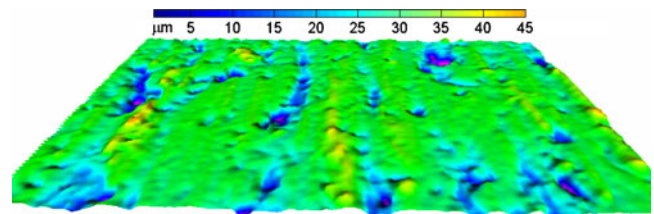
Surface topography of a conventionally dressed metal-bonded grinding wheel
